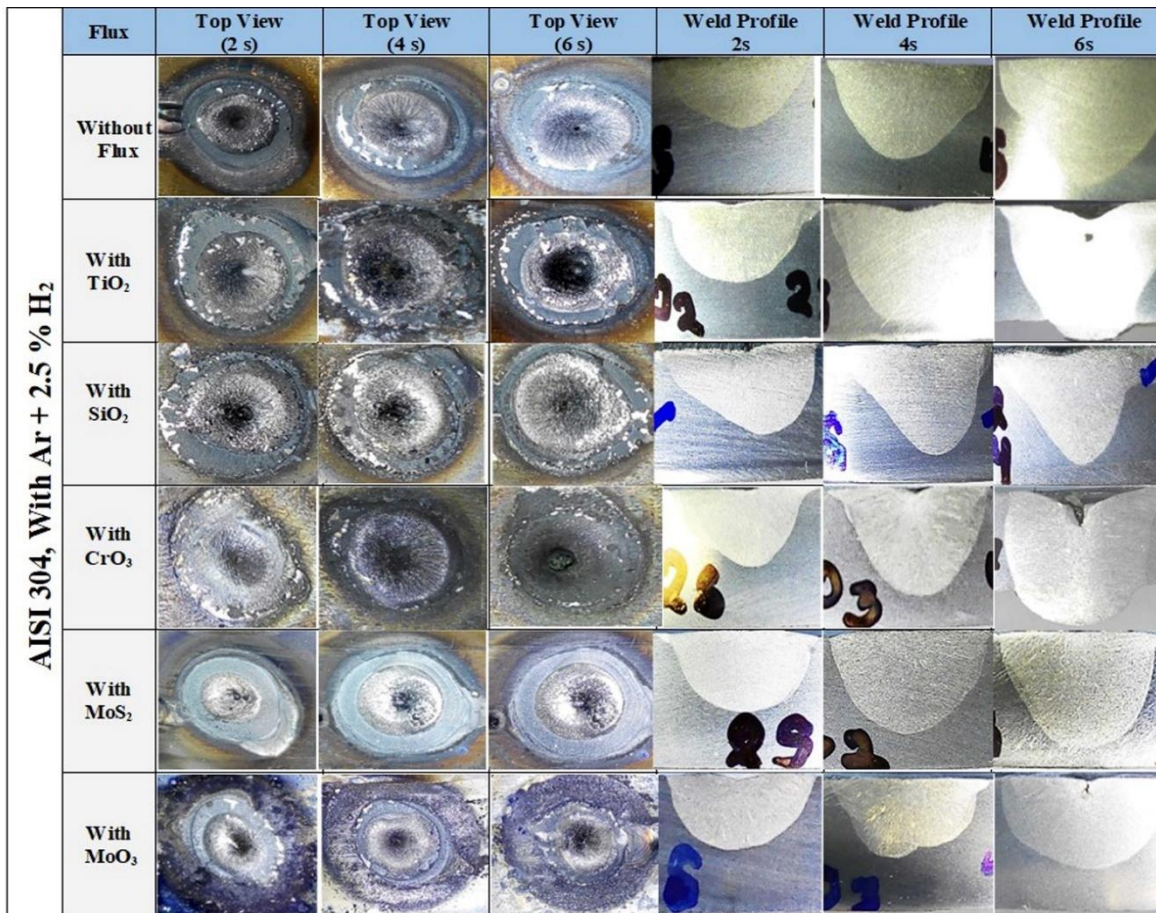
Showing the top surface and penetration of TIG and A-TIG welding of AISI 304 at different arc exposure times using Ar + 2.5 % H₂ shielding
